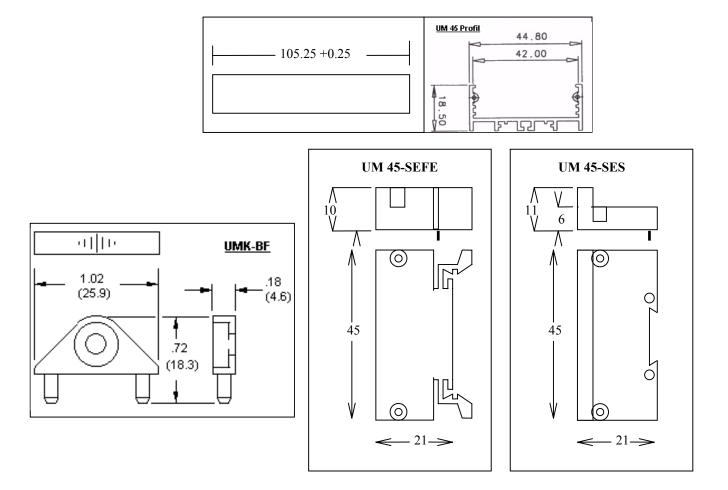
Auxiliary Terminal Board Assembly Drawings
